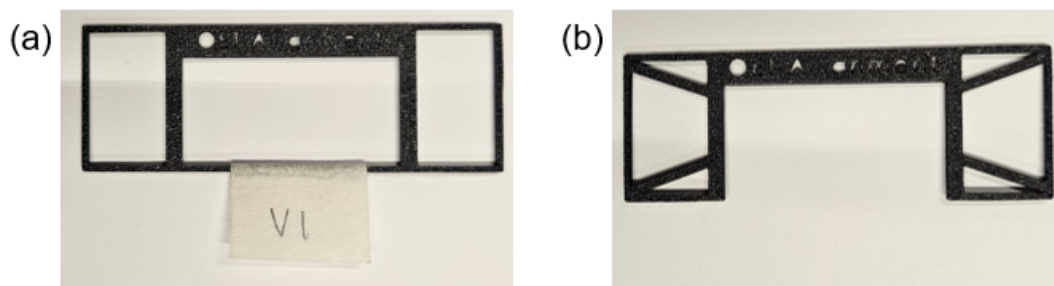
The 3D printed alignment tools that fit a 25mm by 75mm ITO microscope slide. (a) shows version 1. (b) shows version 2.
